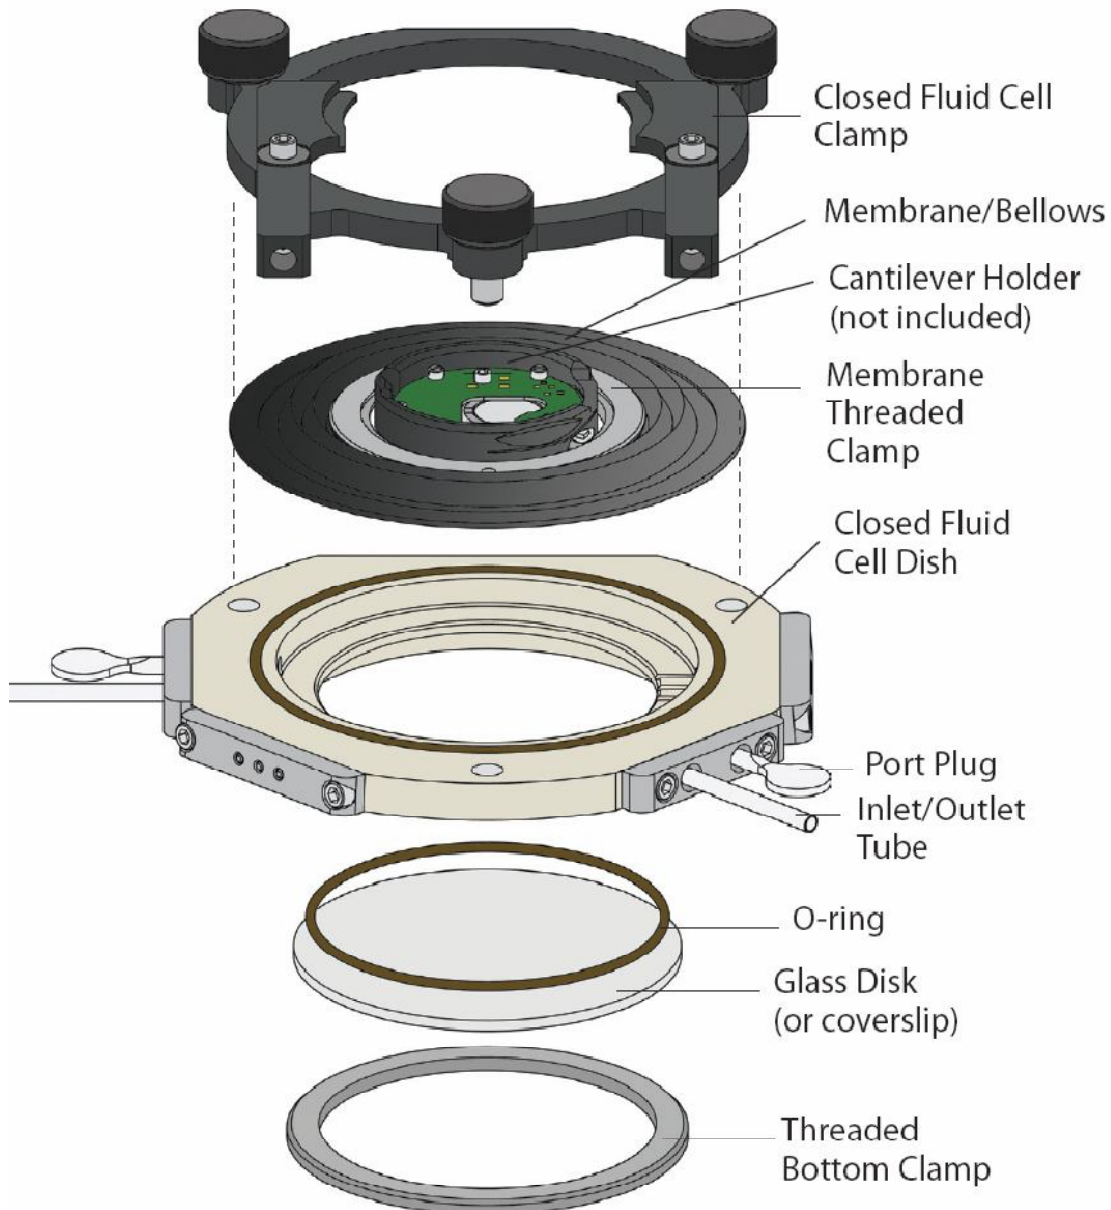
Closed Fluid cell sketch. This figure shows the Closed cell parts. The fluid cell is made of a PEEK™ base that holds a 35mm diameter by 1mm thick glass disc for sample mounting. This glass disc can be replaced with special mounts that can hold 12mm or 25mm circular cover slips for high NA inverted optical microscopy.
